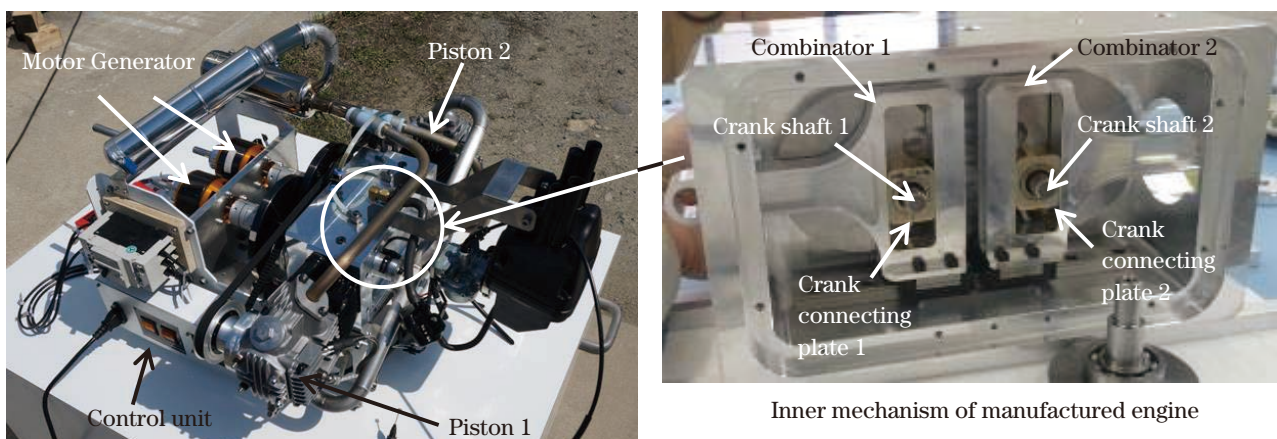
Mirror arrangement XY separate crank mechanism multiple cylinder engine.
